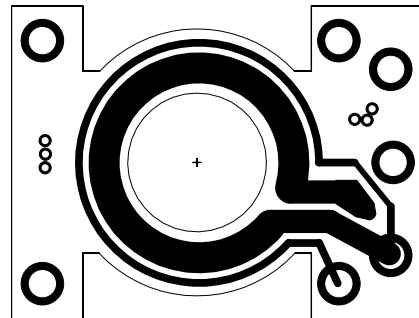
F. BOTTOM LAYER: 1 TURN SECONDARY AND SR WINDINGS
